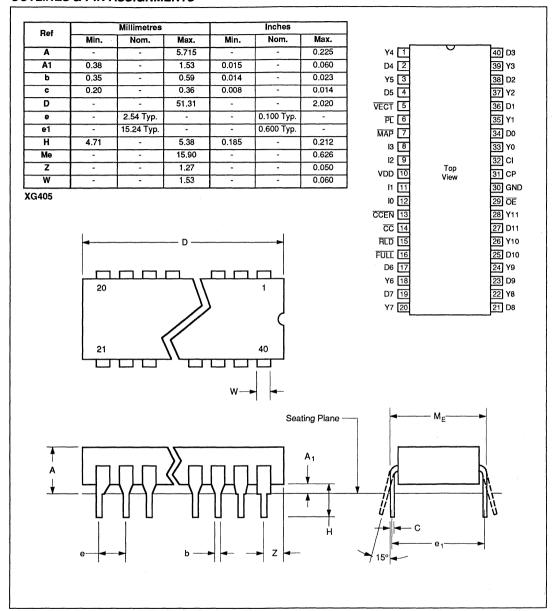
40-Lead Ceramic DIL (Solder Seal) - Package Style C
